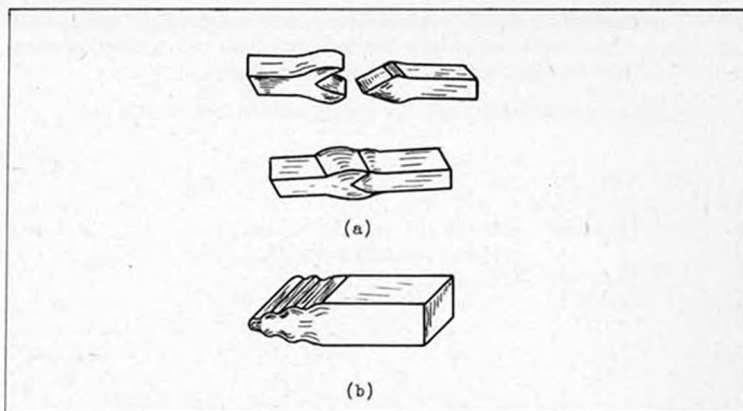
Split Weld -- Heavy Sections
